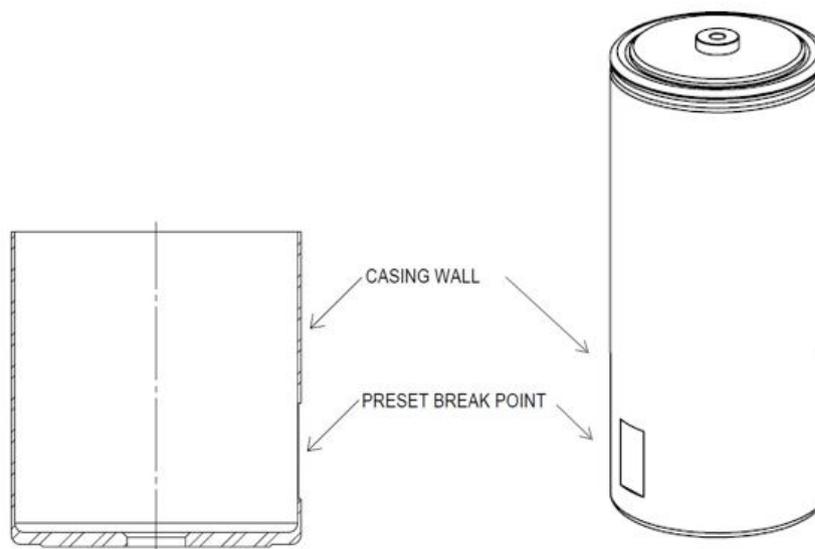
SkelCap casing model with machined preset breakpoint relief.
